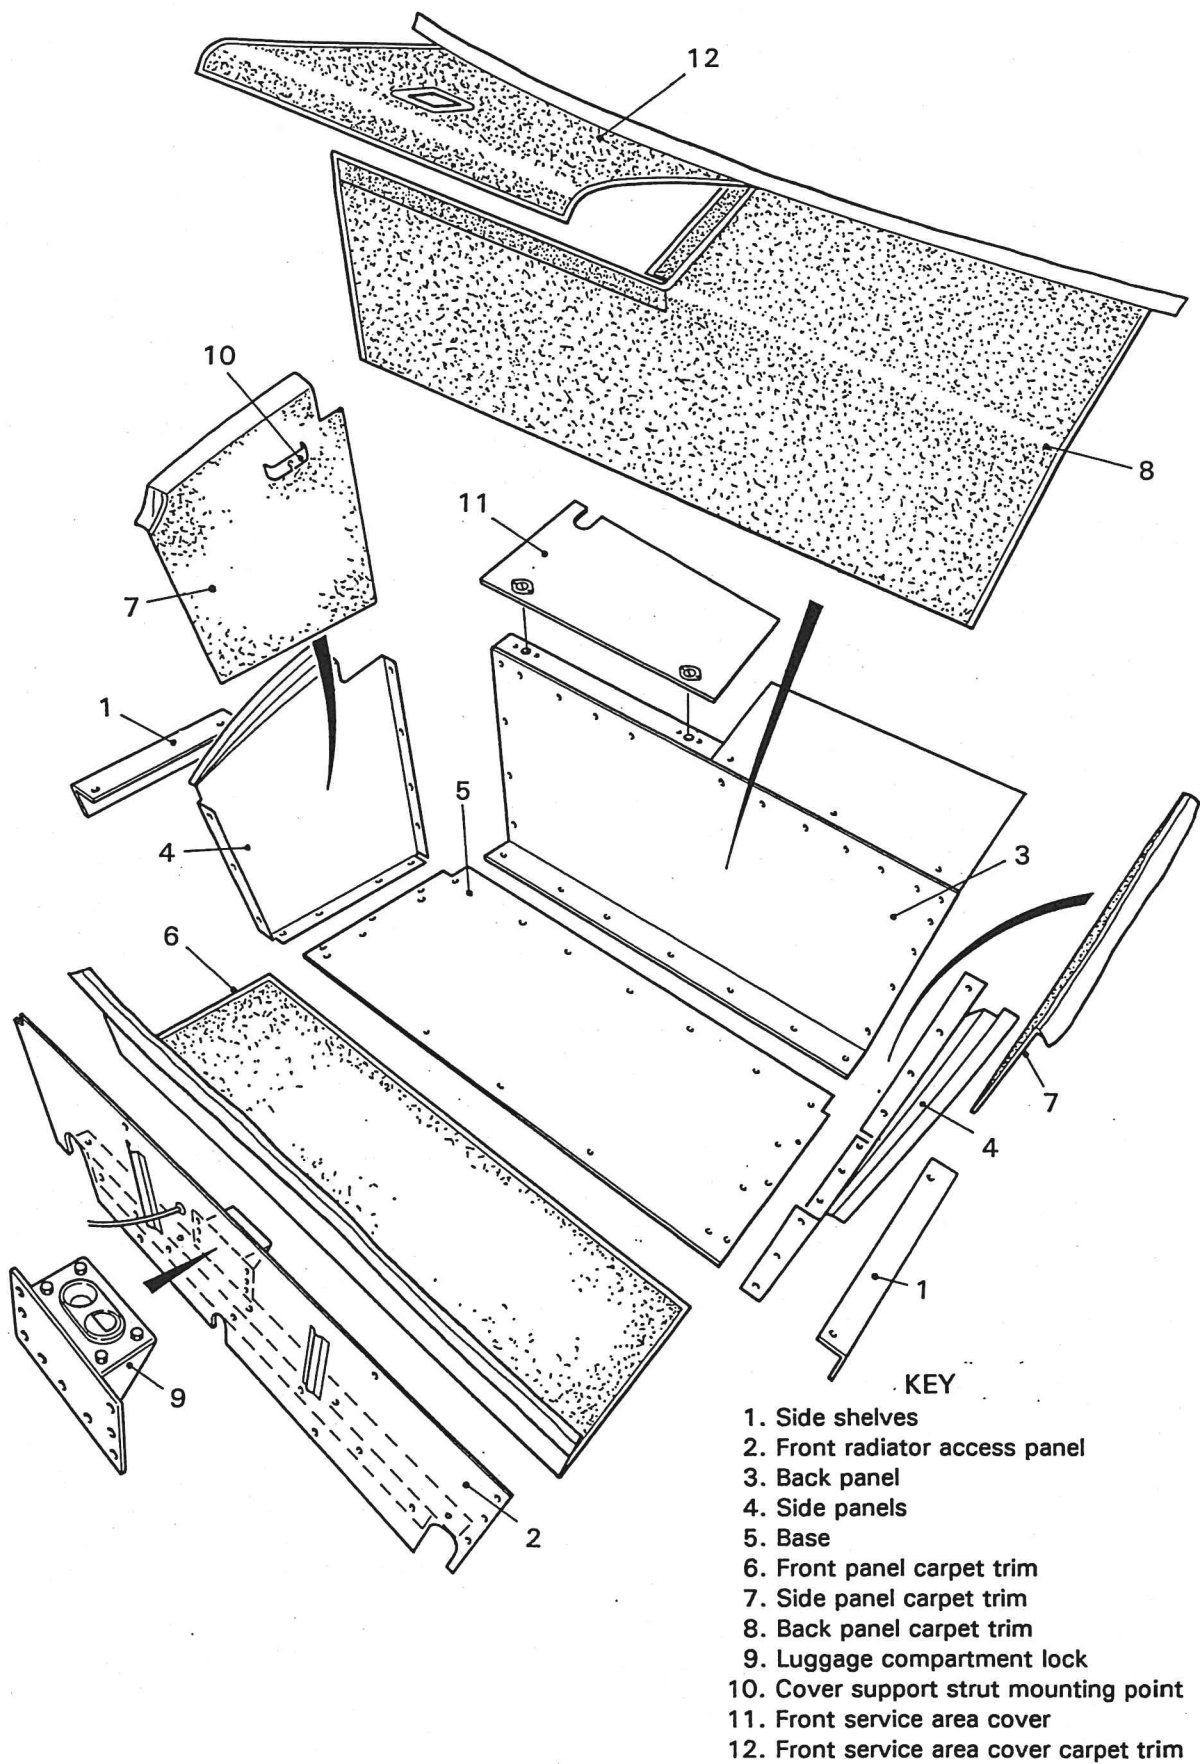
Luggage Compartment Trim (Right-hand Drive Car Shown)
